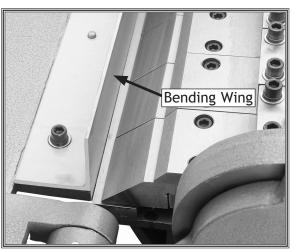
Bending wing moved approximately perpendicular to fingers to act as a straightedge.
